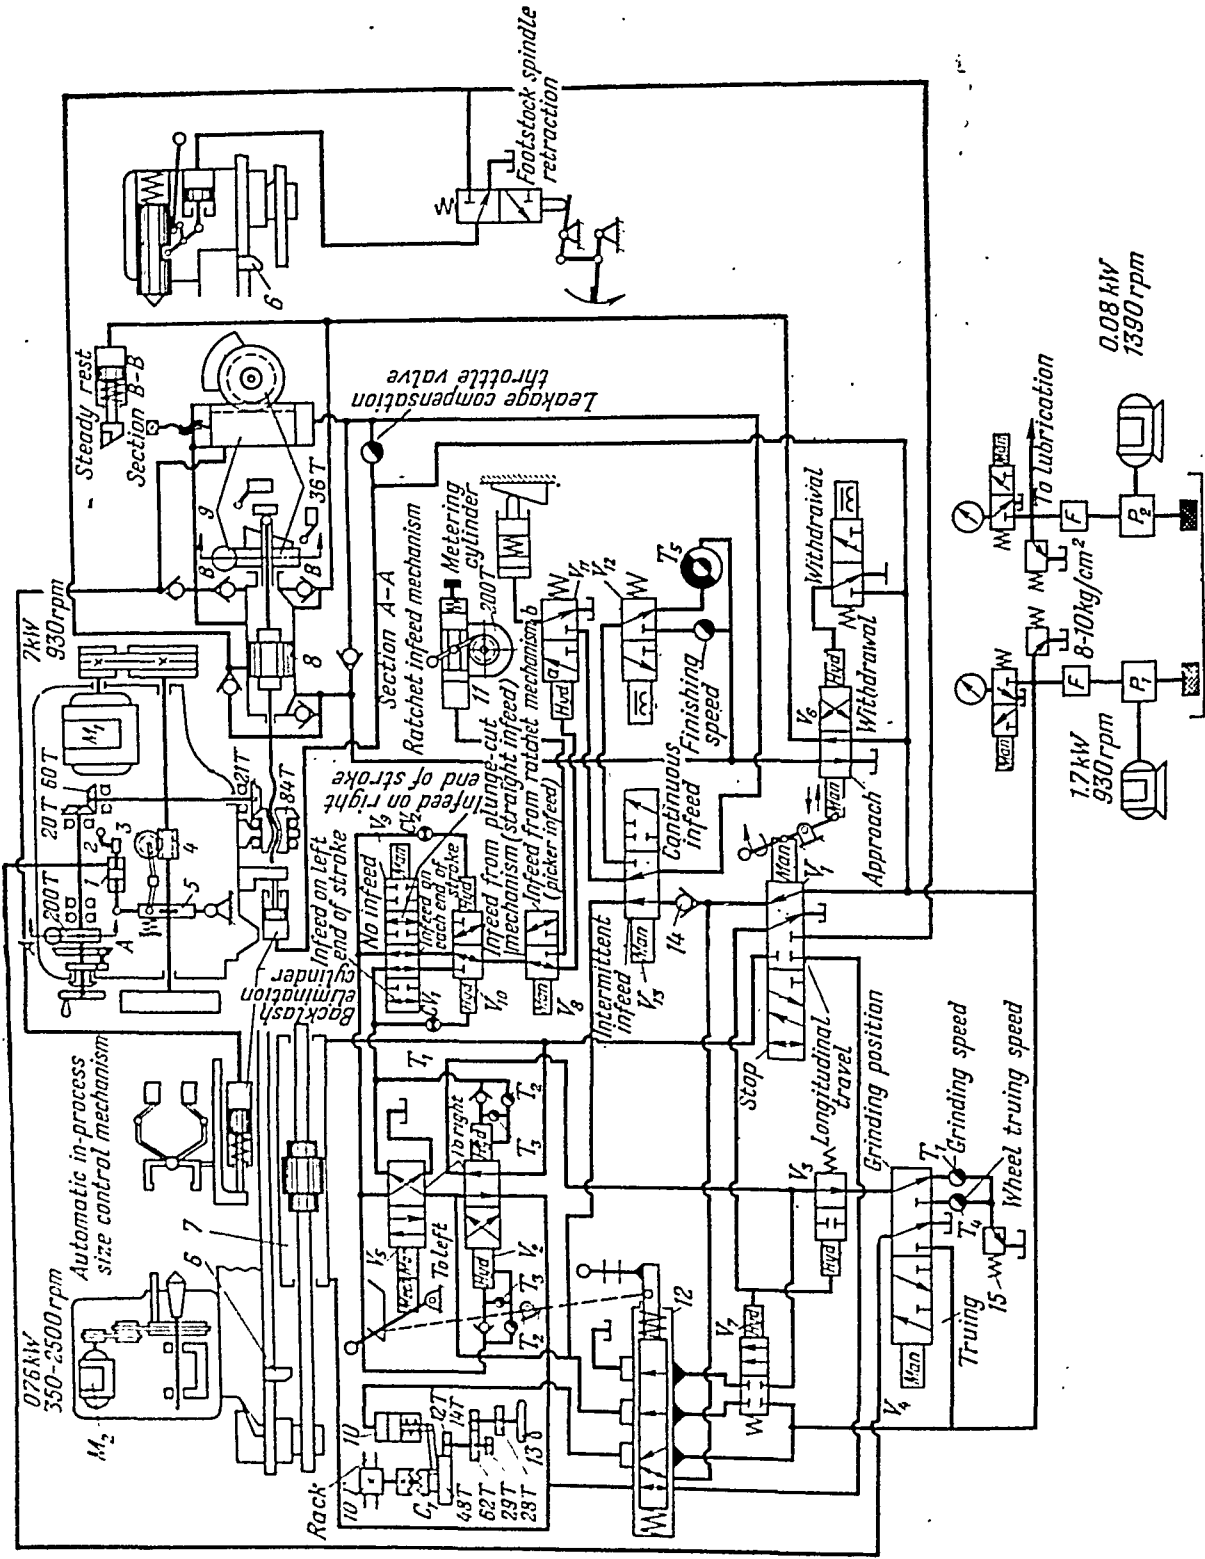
Combined hydraulic circuit and gearing diagram of the models 3A151 and 3A161 cylindrical grinders
